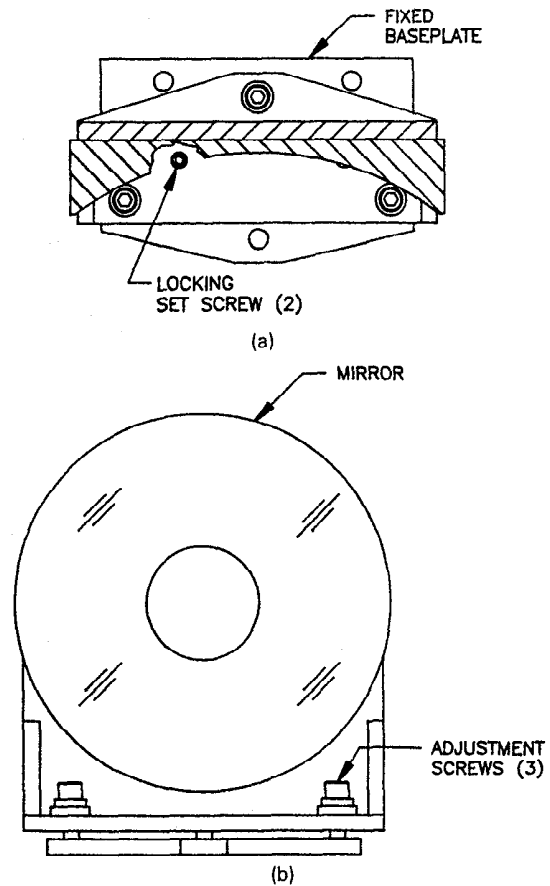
Mirror mount assembly showing the adjustment scheme: (a) top view, mirror and mount are shown in section to depict the adjustment and set screws, and (b) front view.
